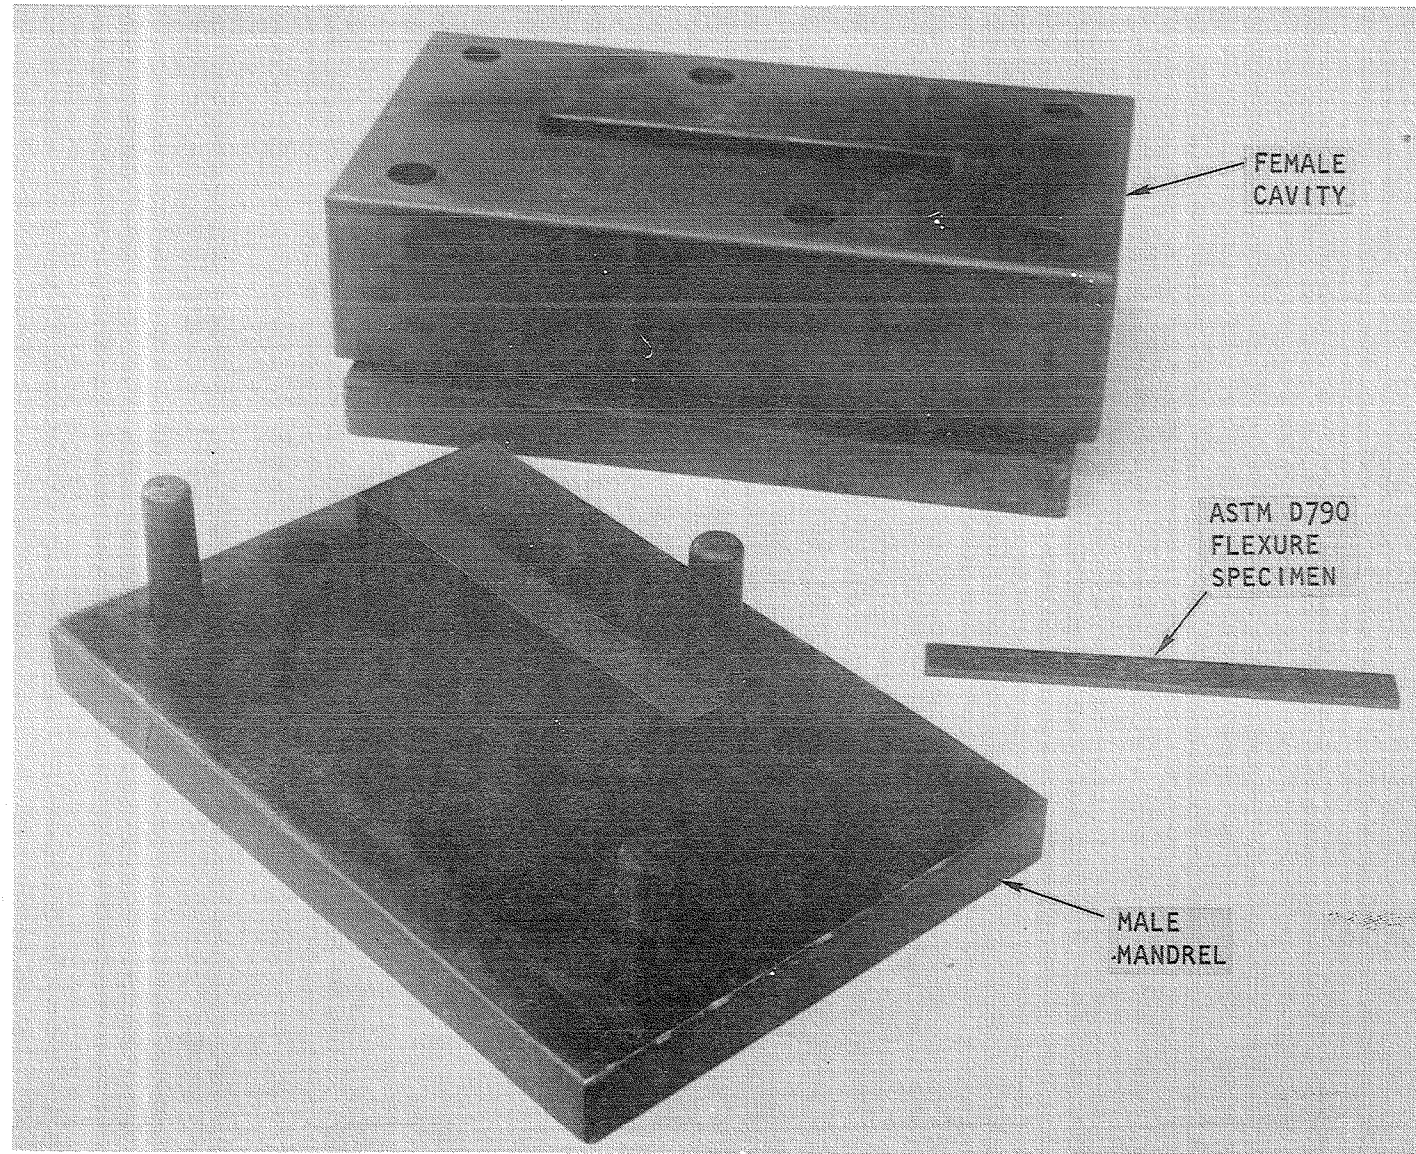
ASTM D 647 Compression Mold for Celion/LARC 160 Molding Compound Flexure Specimen per ASTM D 790
